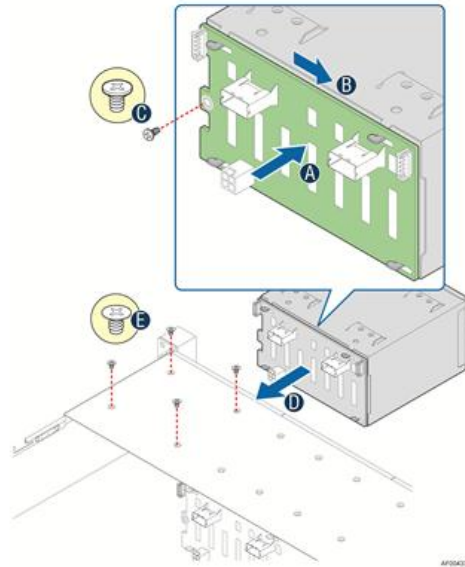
2.5" Hot-Swap Backplane and Drive Bay Assembly
